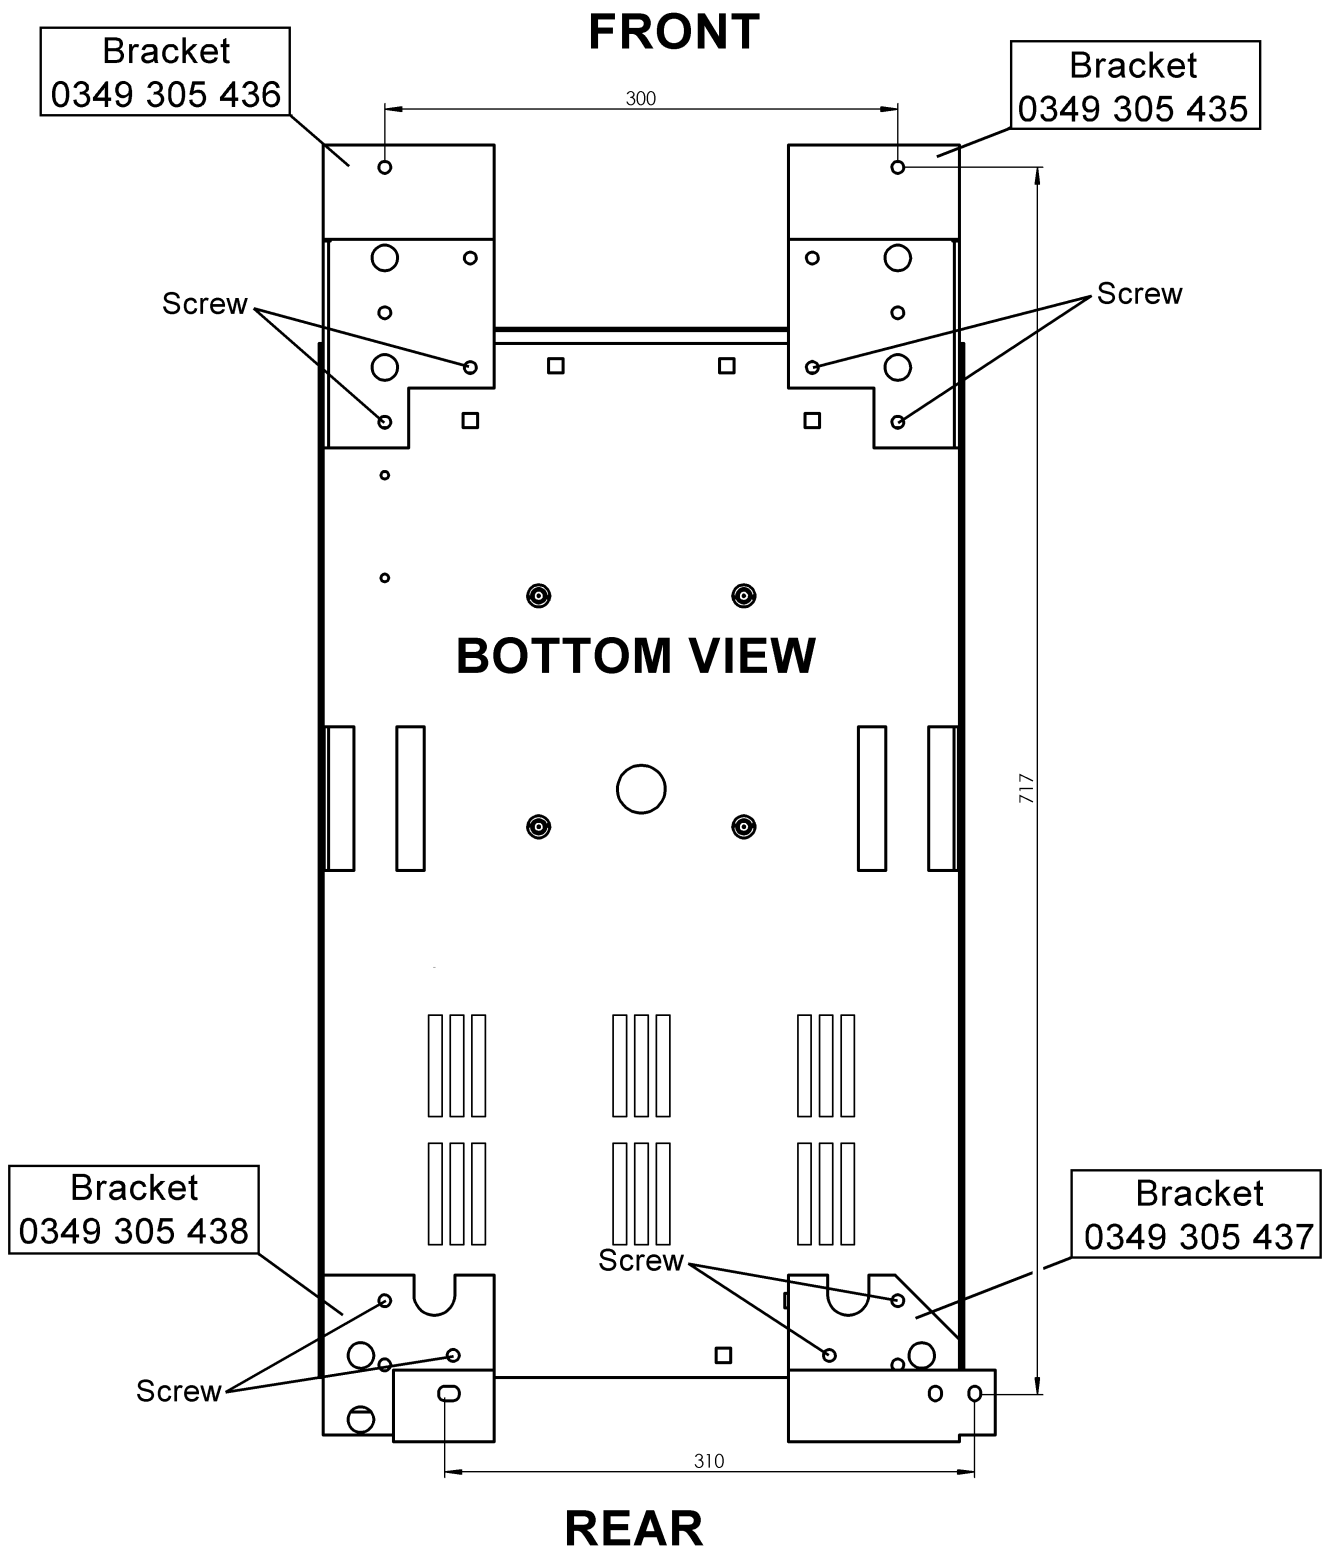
Mounting brackets fastening on Origo™ Mig 630t.
